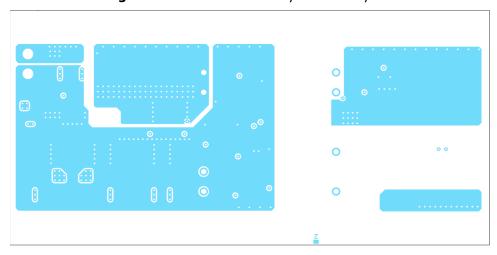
RDR-85SLR Mid-Layer 2 PCB Layout.
